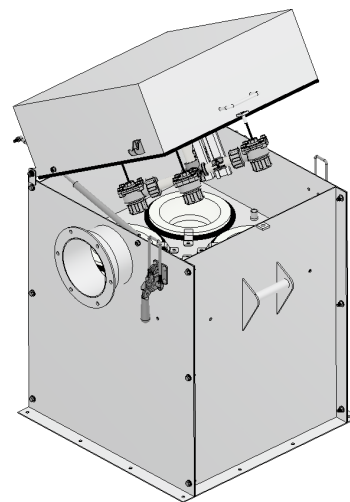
Prototype Dustinator with side-flange for attaching a remote blower. Image by Benetech.
